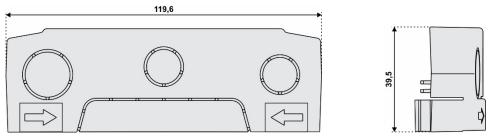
Dimensions of protection cover detachable connections and cavities
